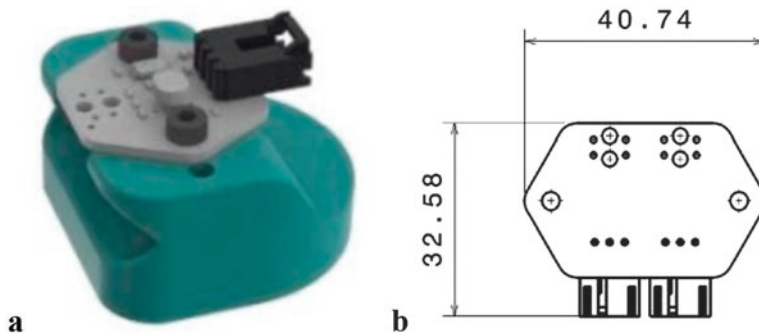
(a, b) ZUM Bloq and ZUM Bloq dimensions in millimeters
